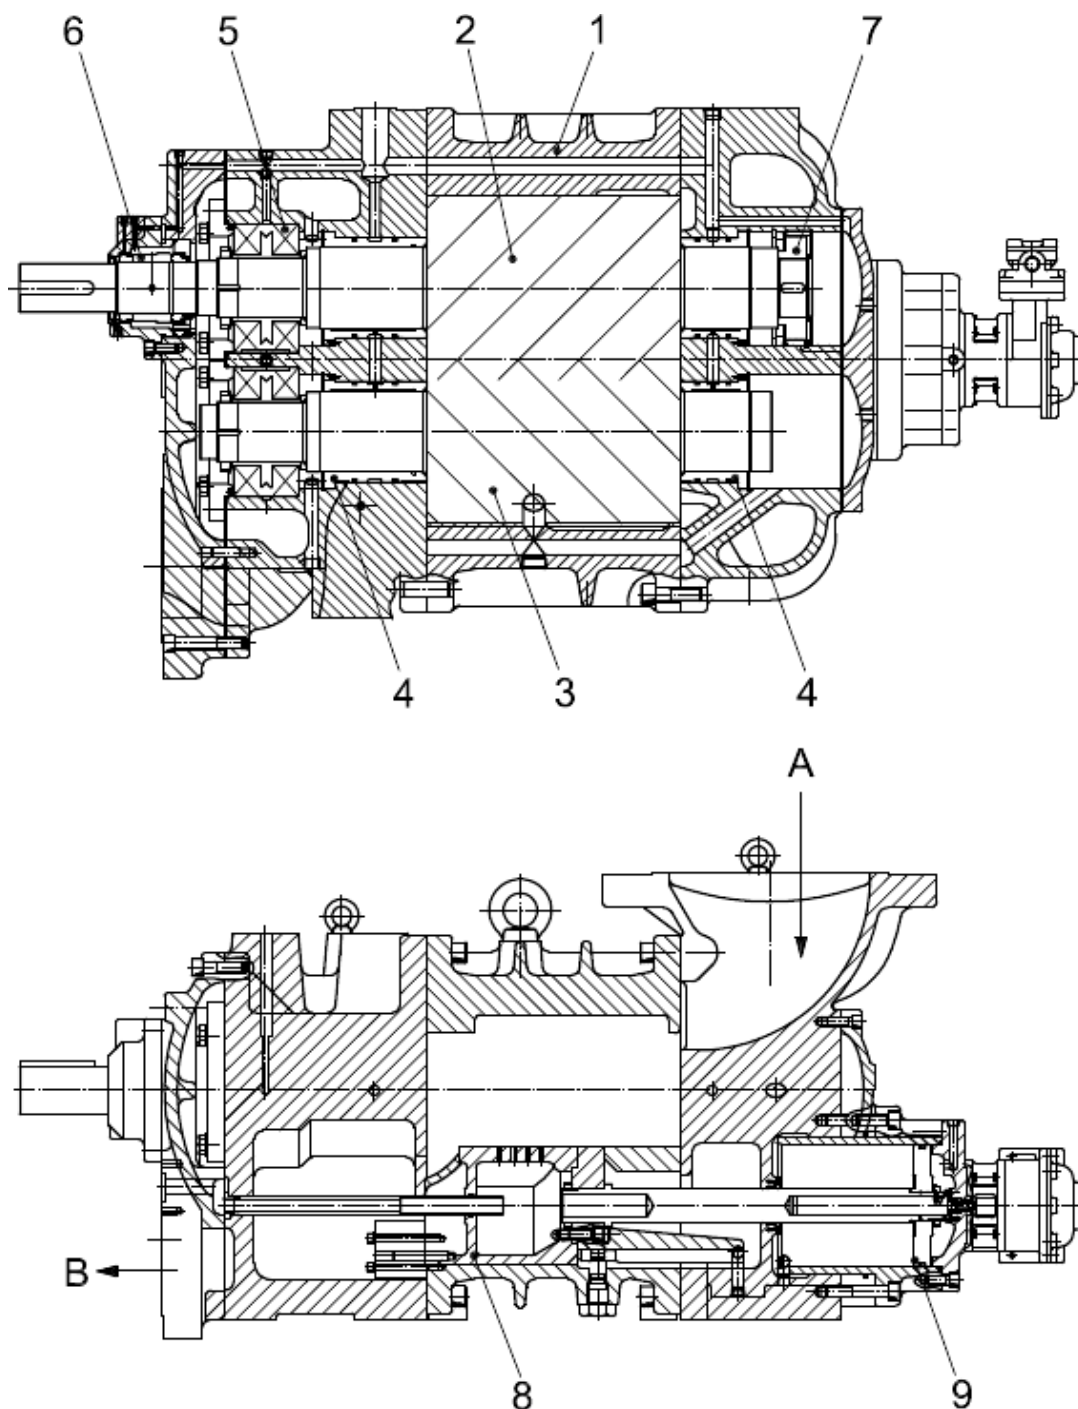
SECTIONS THROUGH FLOODED SCREW COMPRESSOR
